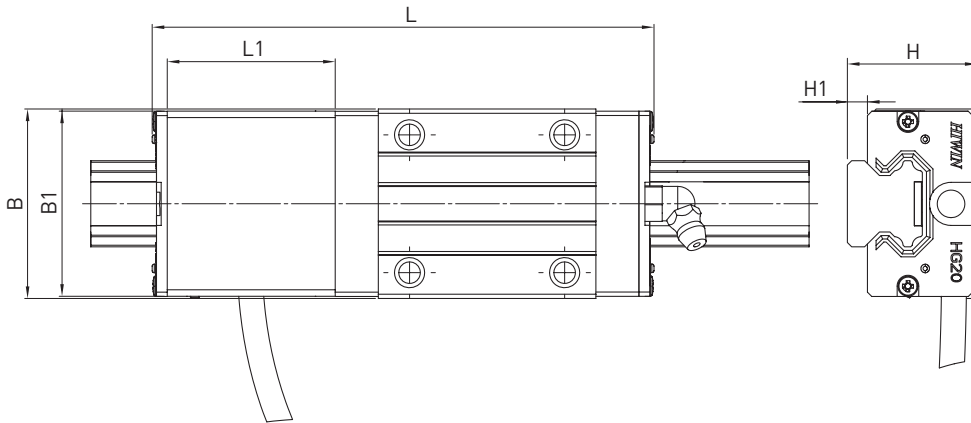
Scale drawing of the HGH20CA block including the MAGIC-PG housing
